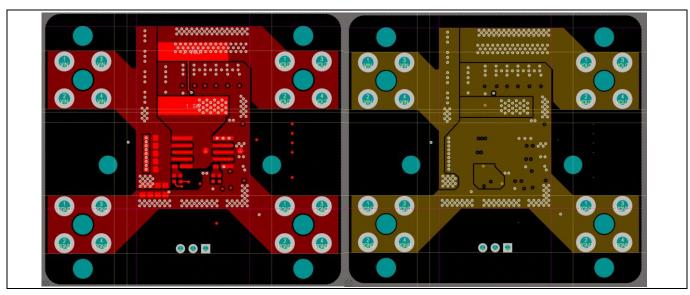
PCB layout top layer (left) and mid-layer 1 (right)
